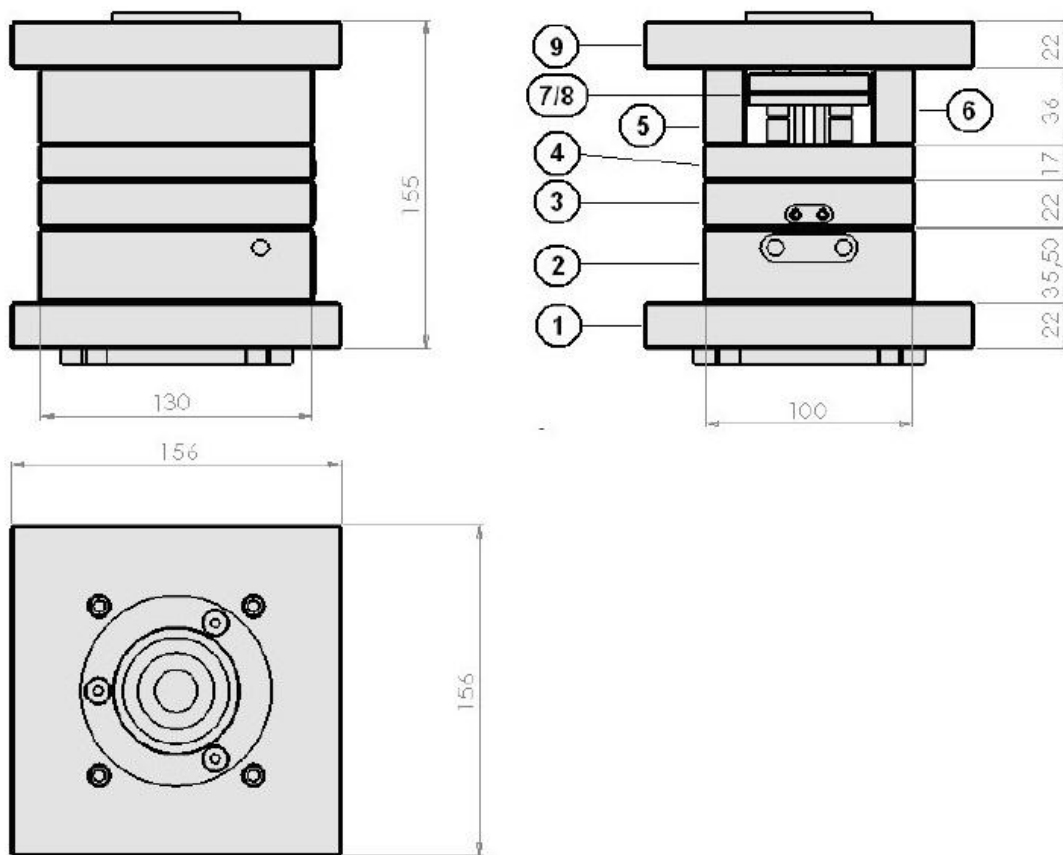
Mould structure: 1) cavity retainer plate; 2) cavity plate, intended to support the cavity pressure system and the respective wiring; 3) core plate, where the interchangeable moulding blocks are mounted; 4) backing plate, required for removing the moulding blocks; 5, 6) spacers; 7, 8) ejector retainer plate and 9) movable clamping plate (adapted from [202])
